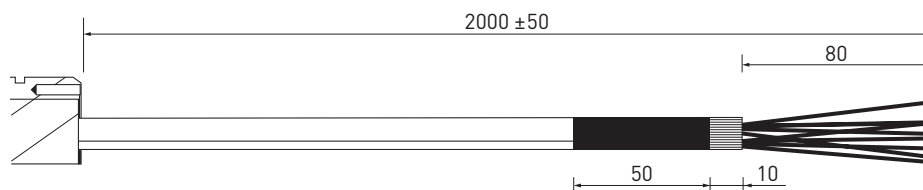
TMRW/TMRI motor and temperature sensor cable
